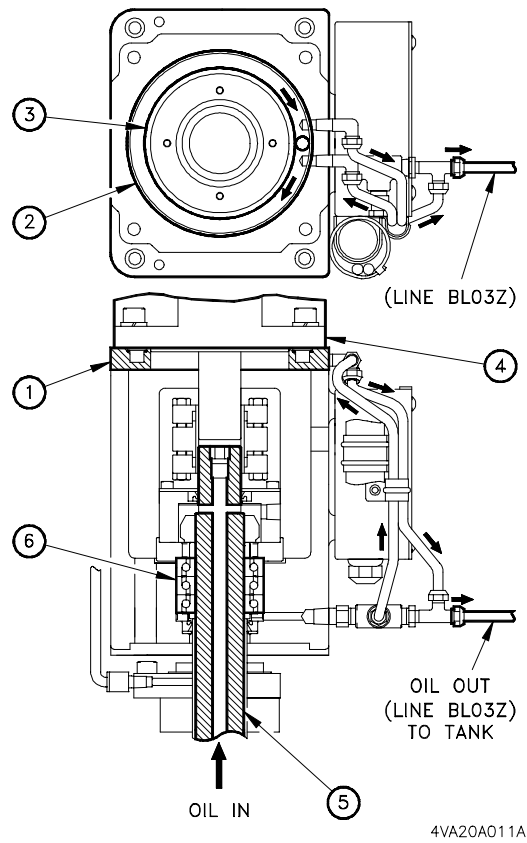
X SERVO MOTOR COOLING PIPING
